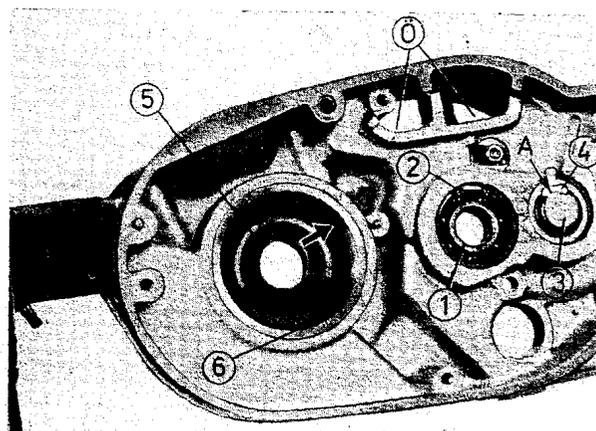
Left-hand housing half - oil guide plate and gearbox bearing
